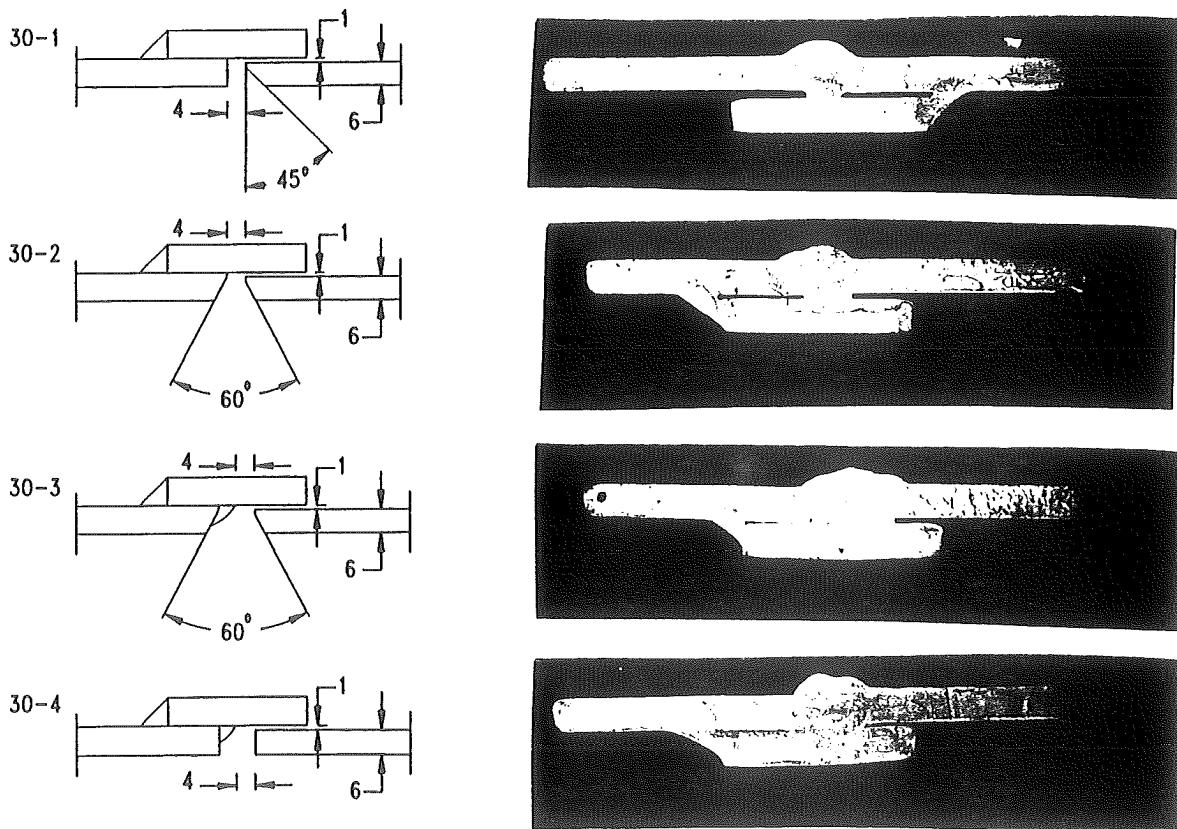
Sections of the welds - welding tests Serie 2.
